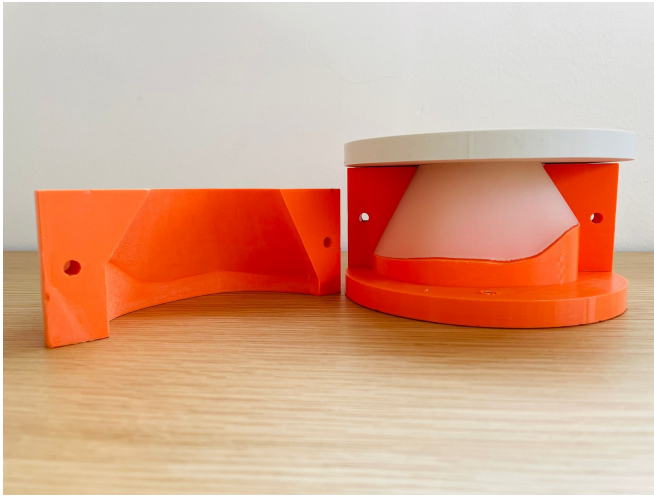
The mould, made of poly-lactic acid (PLA), enabled to produce customized *Vacuum Bell* by silicone injection. The dimensions of the mould shown are 150 mm in diameter and 84 mm in height.
